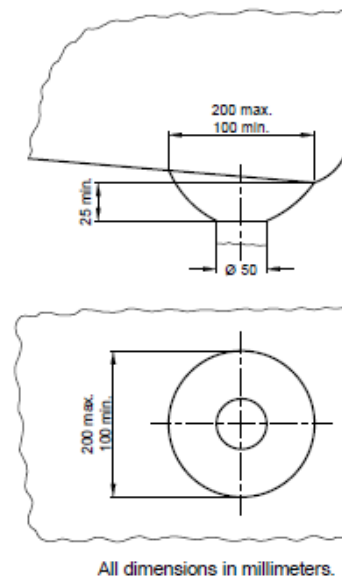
DIMENSIONAL CRITERIA FOR OUTLET WELL
